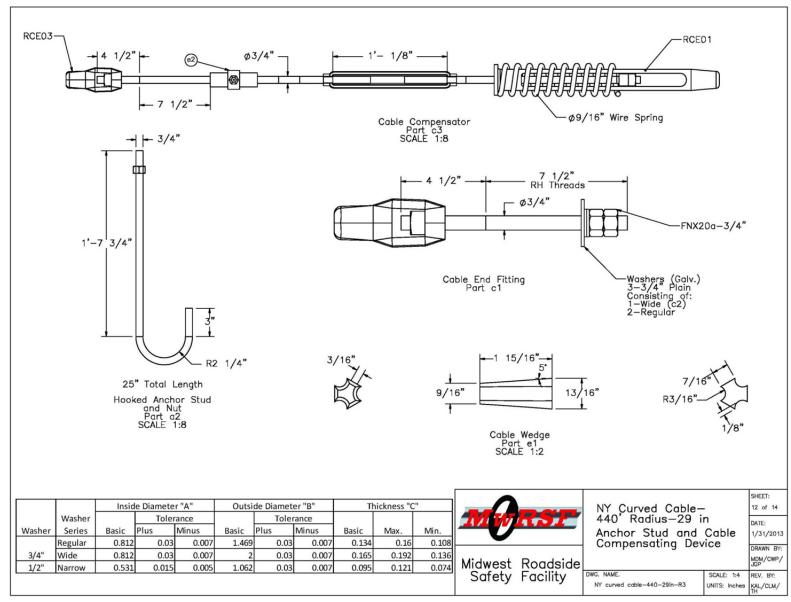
Cable Compensator Component Details, Test No. NYCC-3
